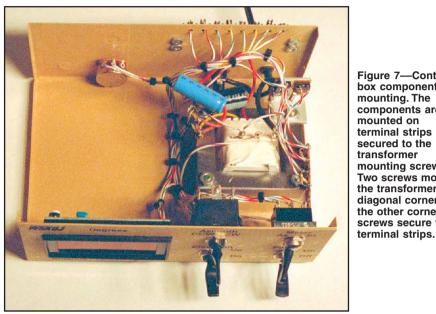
Control box component mounting. The components are mounted on terminal strips secured to the transformer mounting screws. Two screws mount the transformer on diagonal corners; the other corner screws secure the
